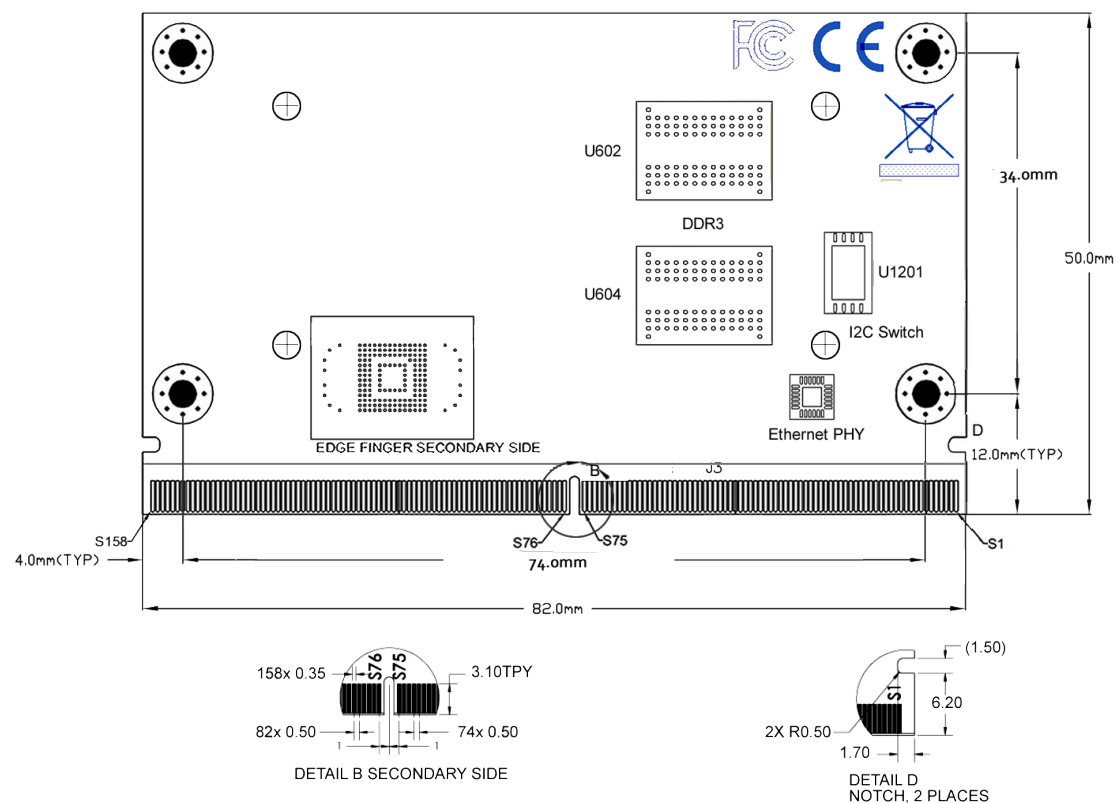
SMARC-FiMX6 Mechanical Drawings (Bottom View)
